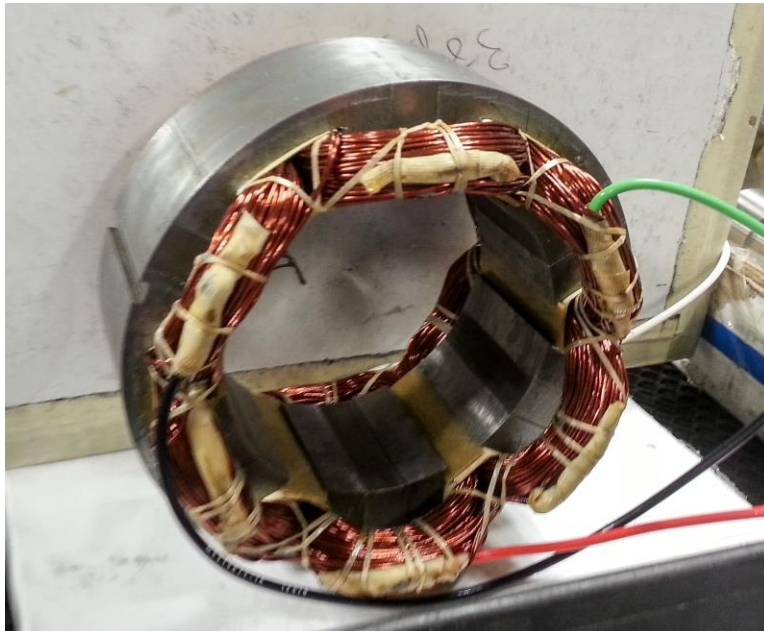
Fabricated one stator of the proof-of-concept prototype dual-stator 6/4 FSPM machine.
